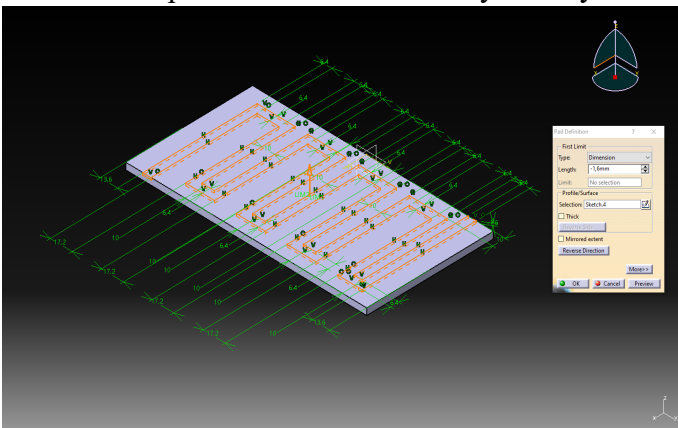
Dimensioning of the simple U-coil mini-channel with the respected dimensions
